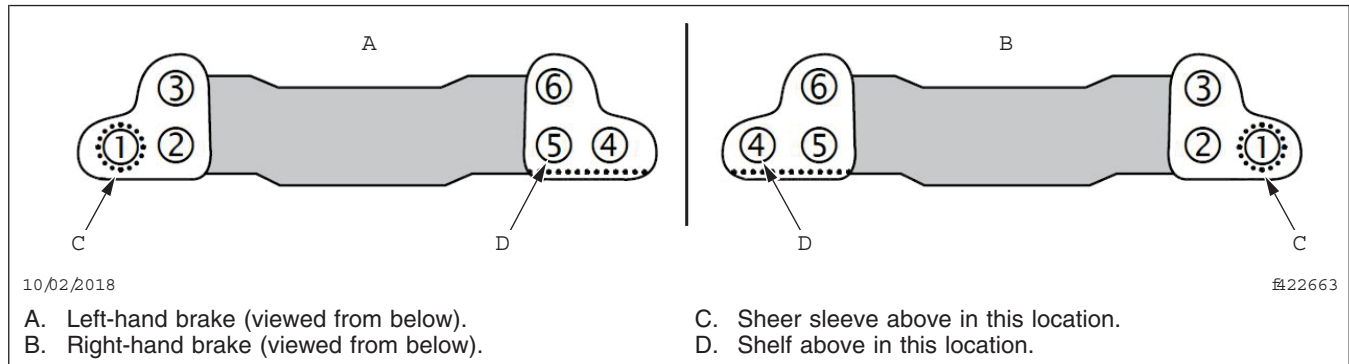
, Tightening Pattern, Bendix Radial Mounted Caliper
